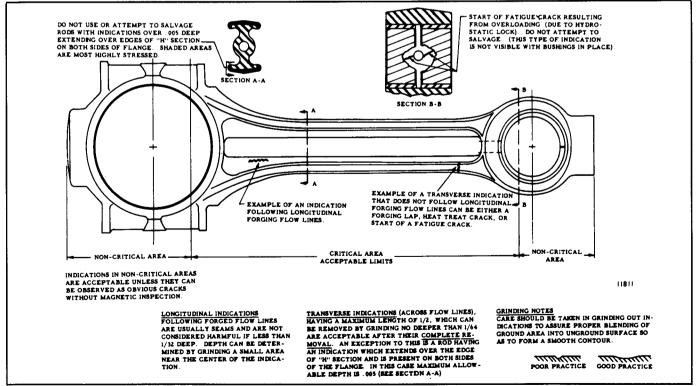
Magnetic Particle Inspection Limits for Connecting Rod
